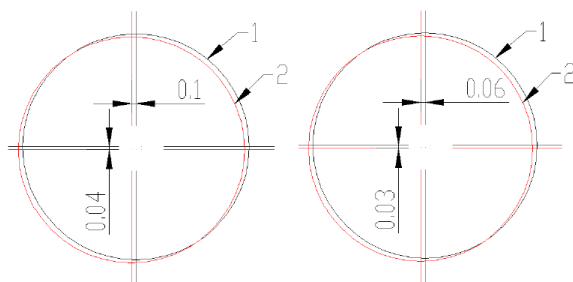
Displacement of the workpiece axis due to the beating for the supporting boards 1 and 2
